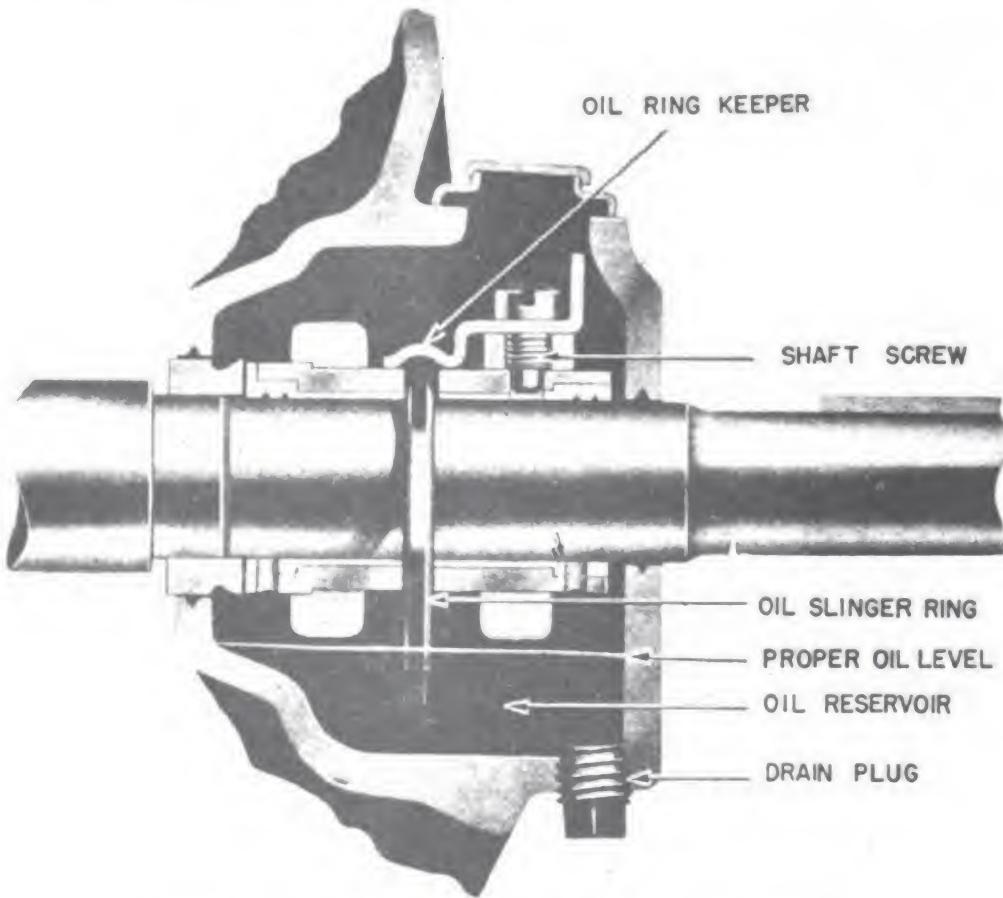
Typical sleeve bearing—oil ring lubricated.
